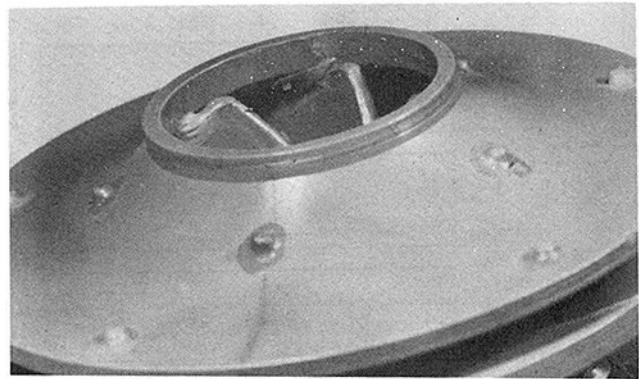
Closeup view of pump impeller that shows cracks between the vanes and shroud. Also note radial crack that extends from the impeller eye to the outside edge of the shroud.
